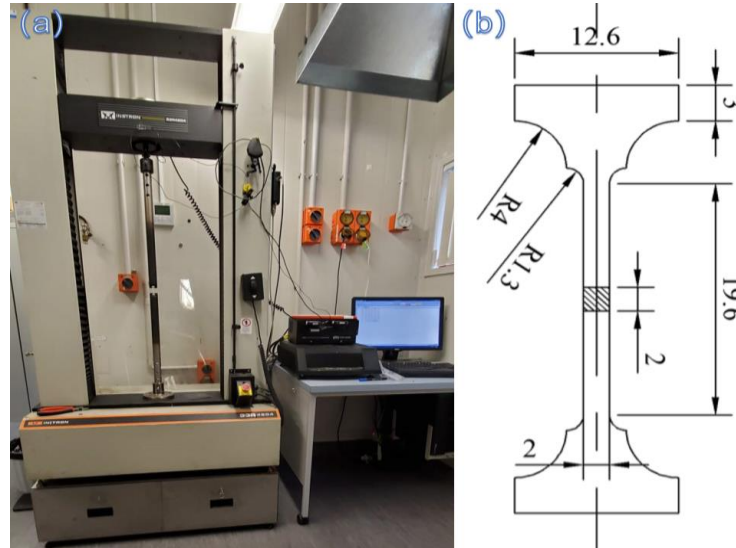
(a) Instron Tensile Tester (INSTRON4204); (b) The Size of Tensile Sample
